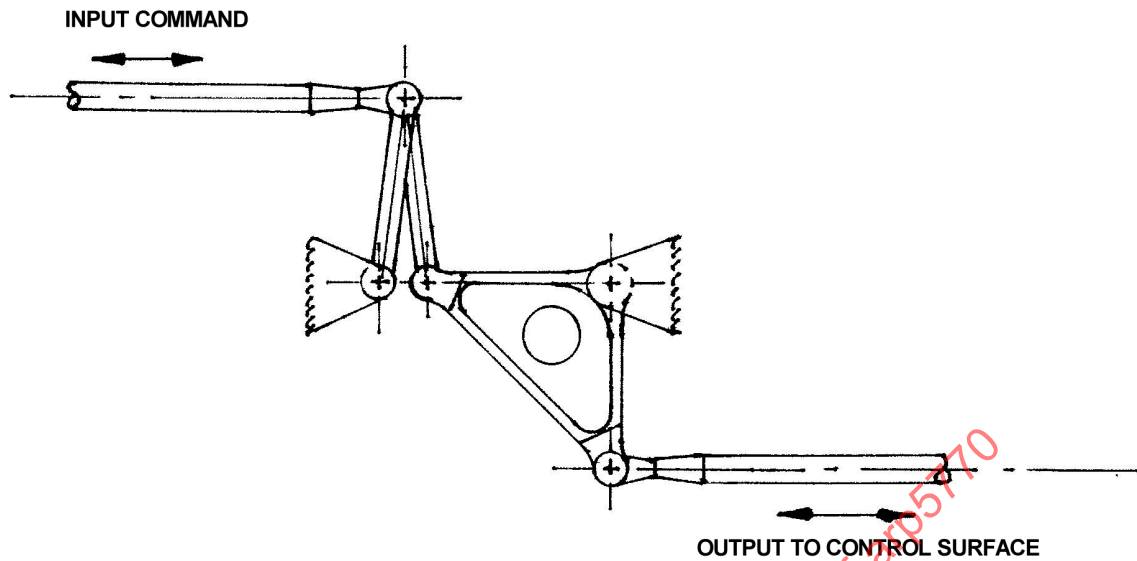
CRANK AND PUSHROD ARRANGEMENT
